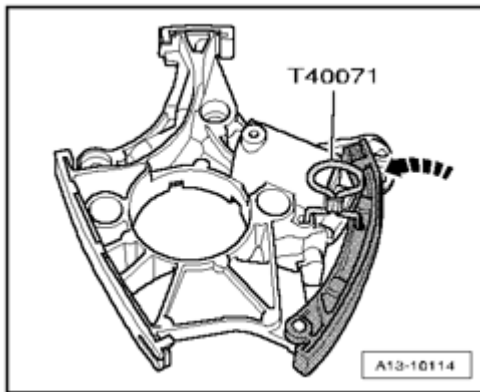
Pressing Guide Rail Of Left/Right Camshaft Timing Chain Inward Up To Stop And Secure Chain Tensioner With Securing Pin T40071
